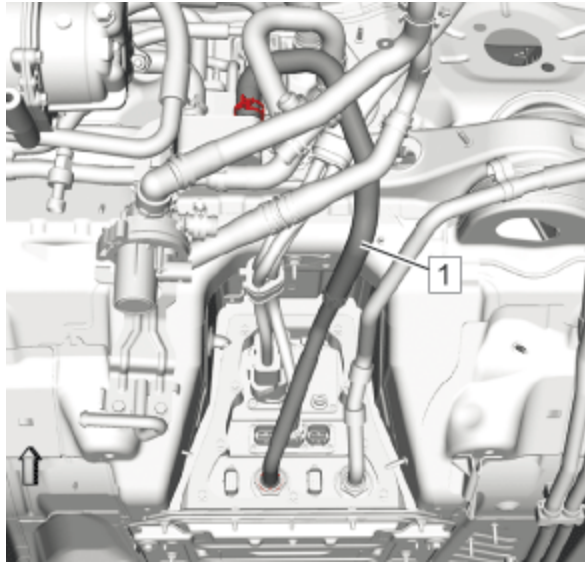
Drive Motor Battery Coolant Inlet Hose
